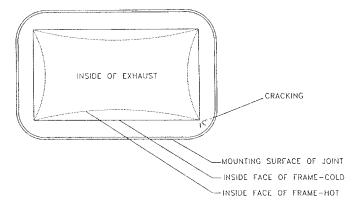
Cracking in an expansion joint. (Source: Townson Expansion Joints.)
